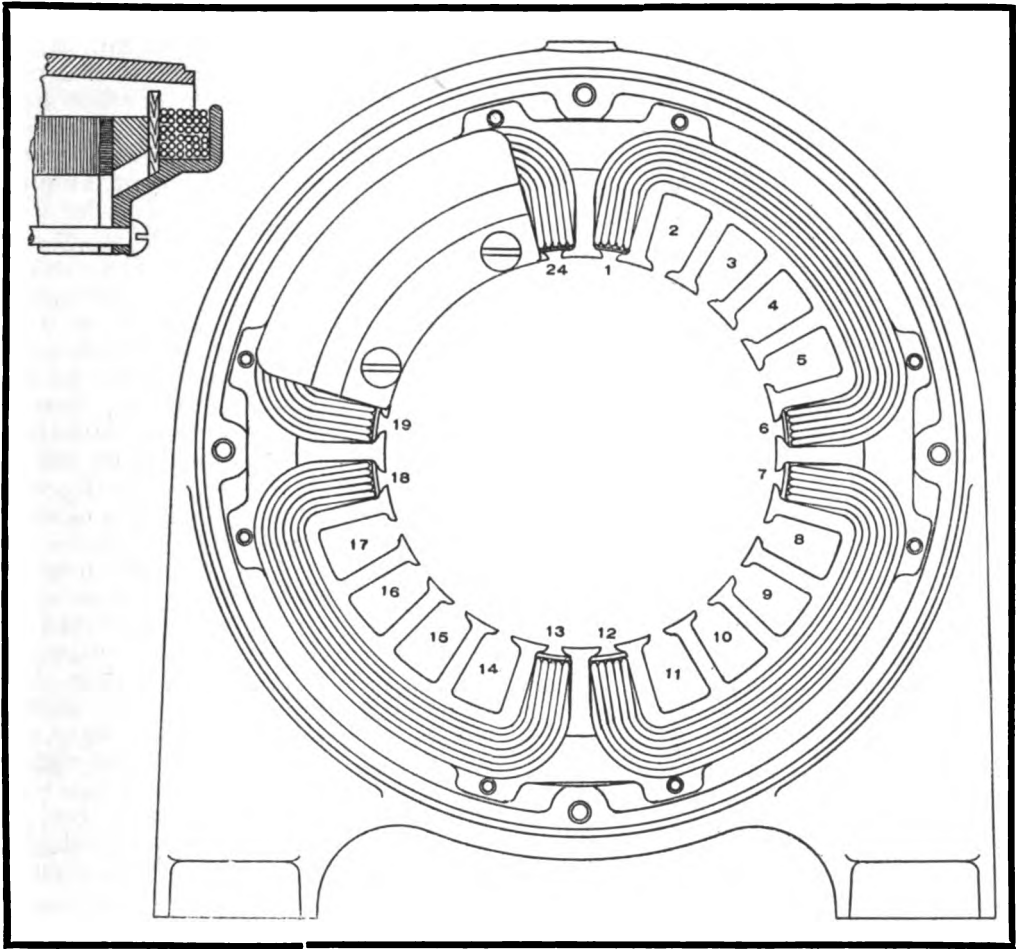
STATOR WINDING FOR SINGLE-PHASE MOTOR, SHOWING STARTING COILS IN POSITION, BUT NOT TAPED
